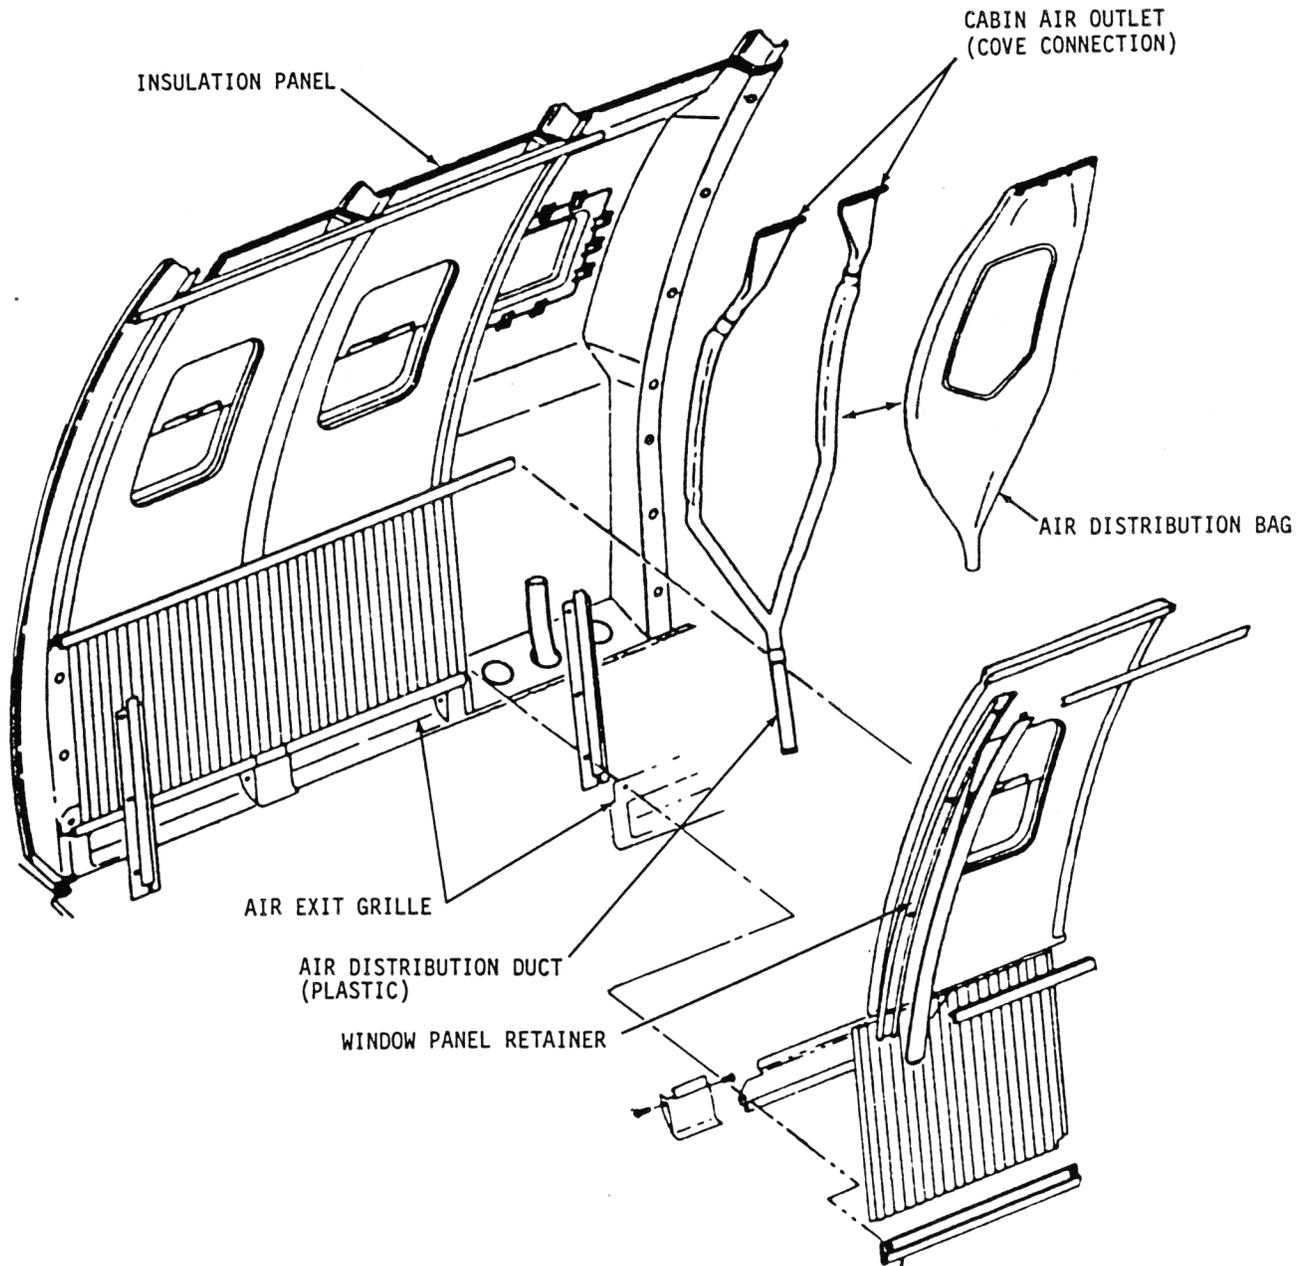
BOEING 707,720 SIDEWALL AIR DUCTS
